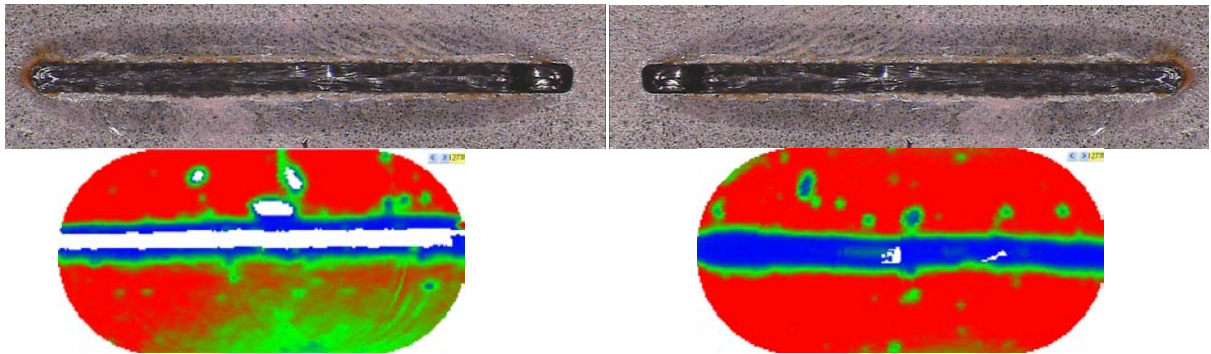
Weld top bead (0.3mm gap, sample B) and Amstech result from top bead (L) and bottom bead (R)
